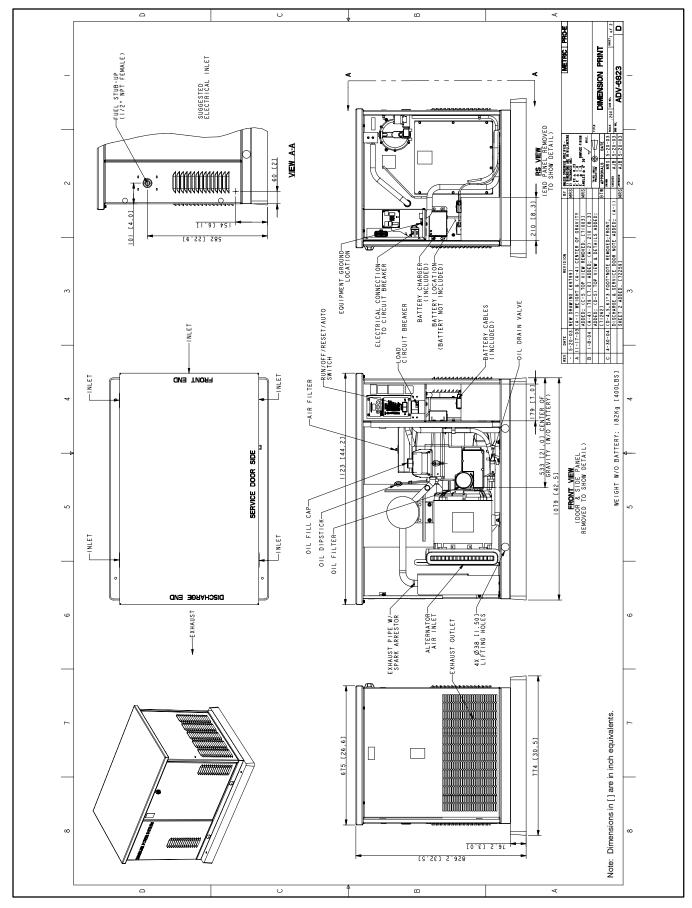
Generator Set Mounting Details and Dimensions, ADV-6823A-C
